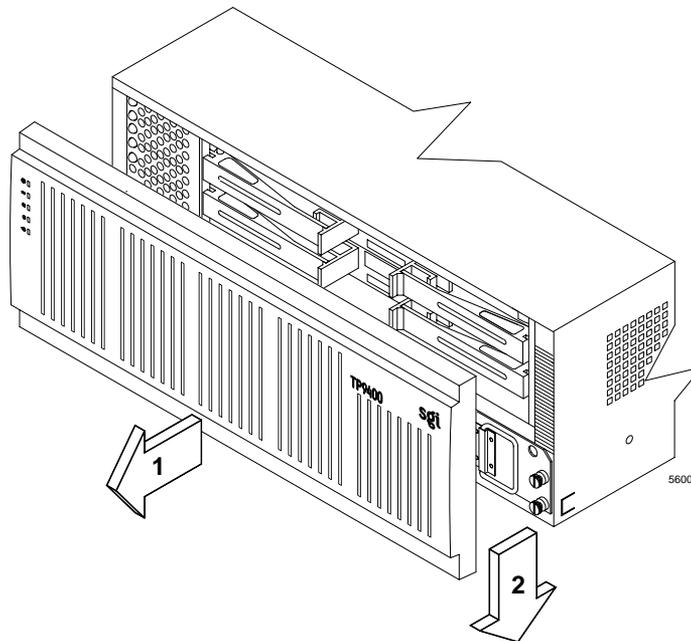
Removing the Front Cover of the Controller Enclosure
